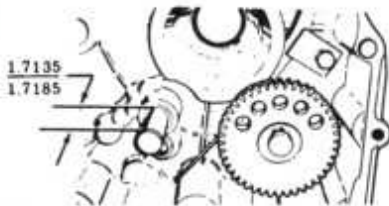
On Models HH80, HH100 and HH120, press balancer gear shafts into cover to dimension shown.
